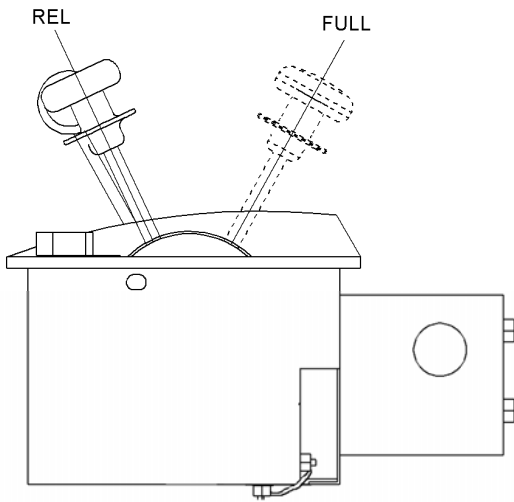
BRAKE VALVE CONTROLLER (P/N 772337)
